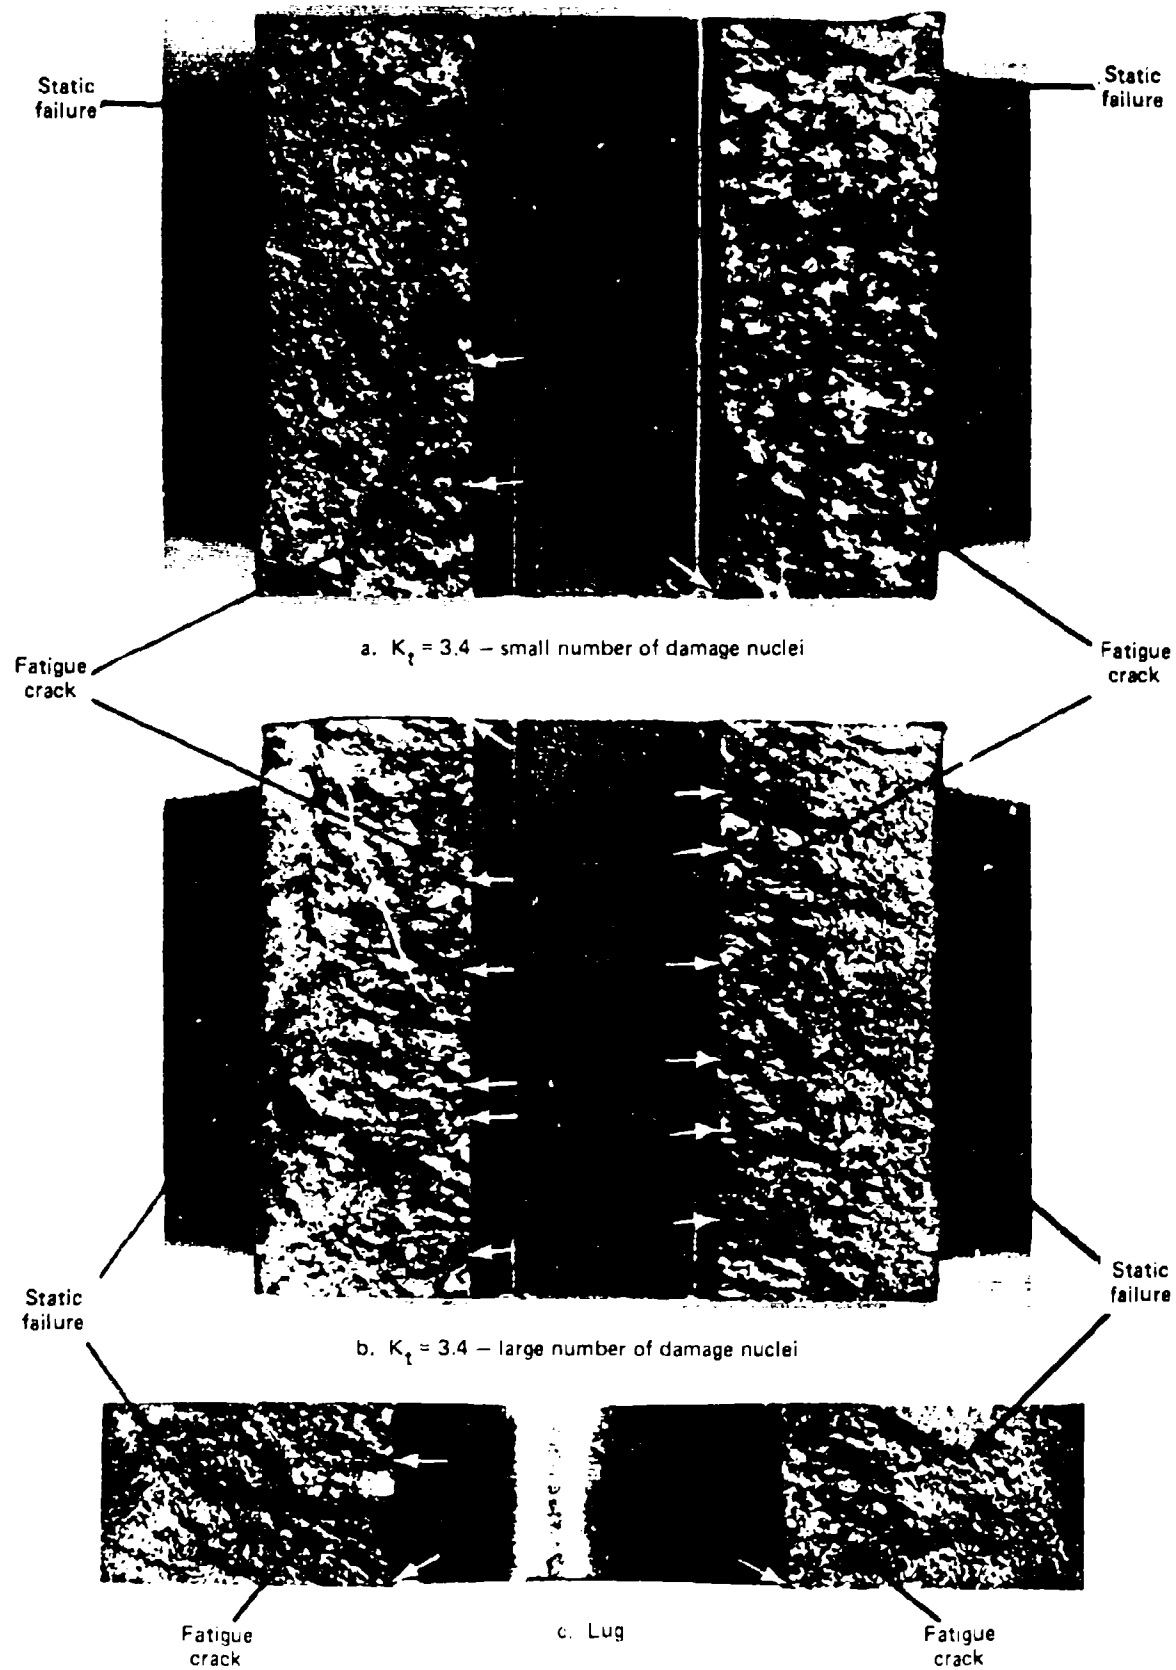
Appearance of fracture surfaces showing positions of damage nuclei
